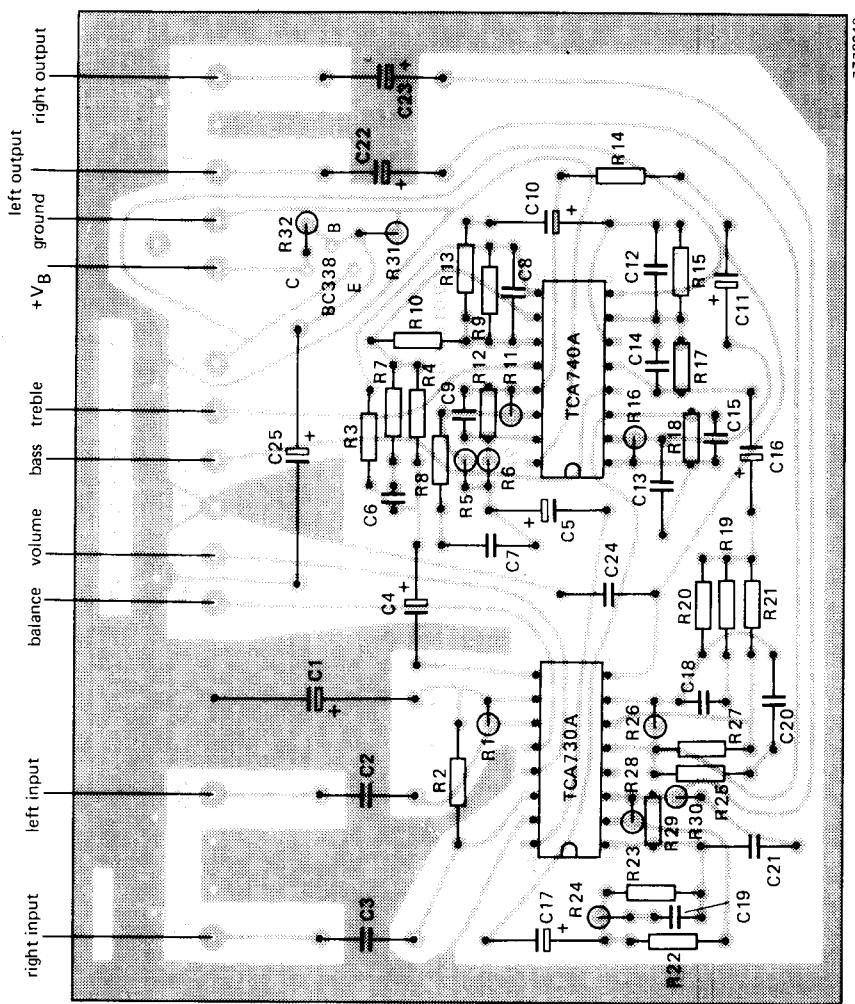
Printed-circuit board component side, showing component layout; for circuit diagram see Fig. 7.
